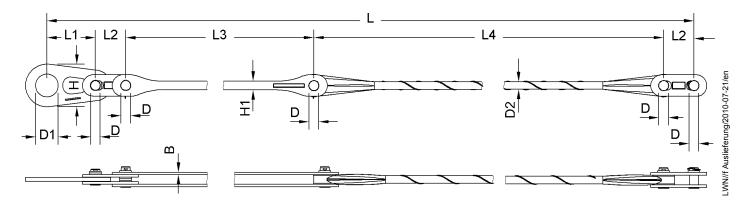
Dimensions of jib pendant strap on 2316 jib head section
